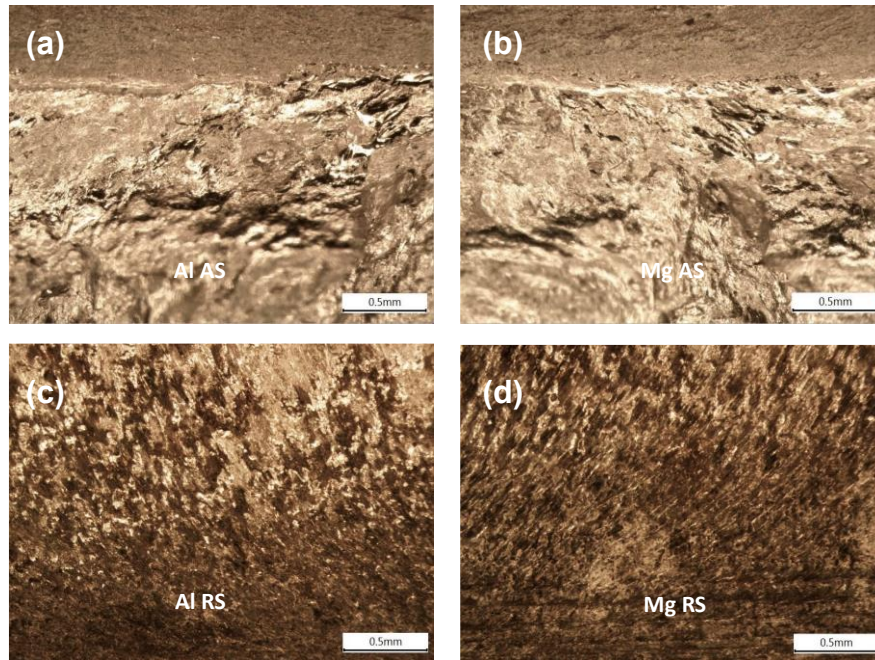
FSW weld failed after fatigue. (a) Top 6022 Al; (b) Bottom ZEK100 Mg.
